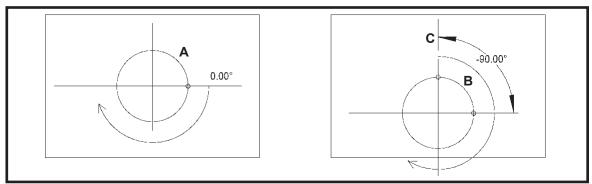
Weld Start Position for On-center (left) and Offset or Hillside (right) nozzles.
